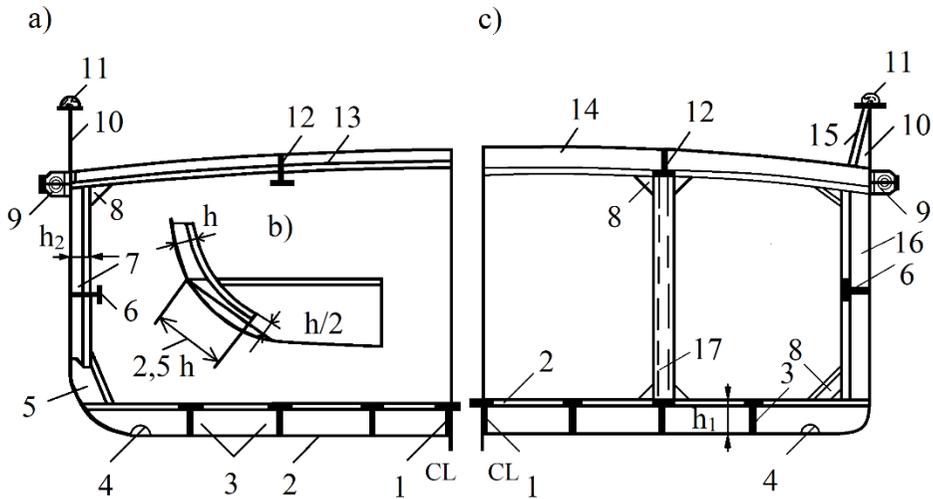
Structural Manufacture of Frames with a Transverse System of Stiffening
